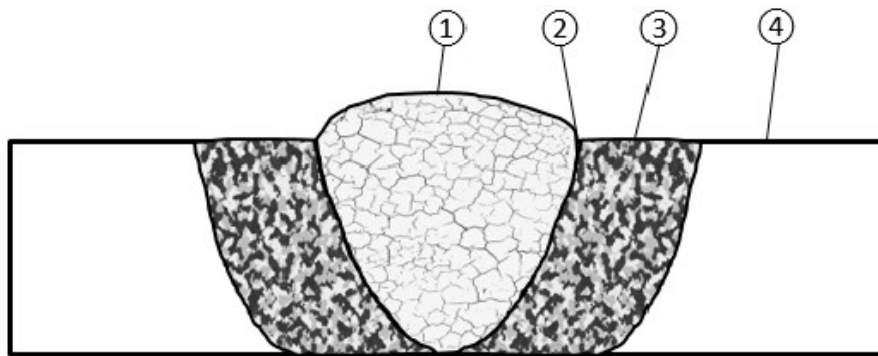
Representing the Fusion welding zone during welding [Research gate].
